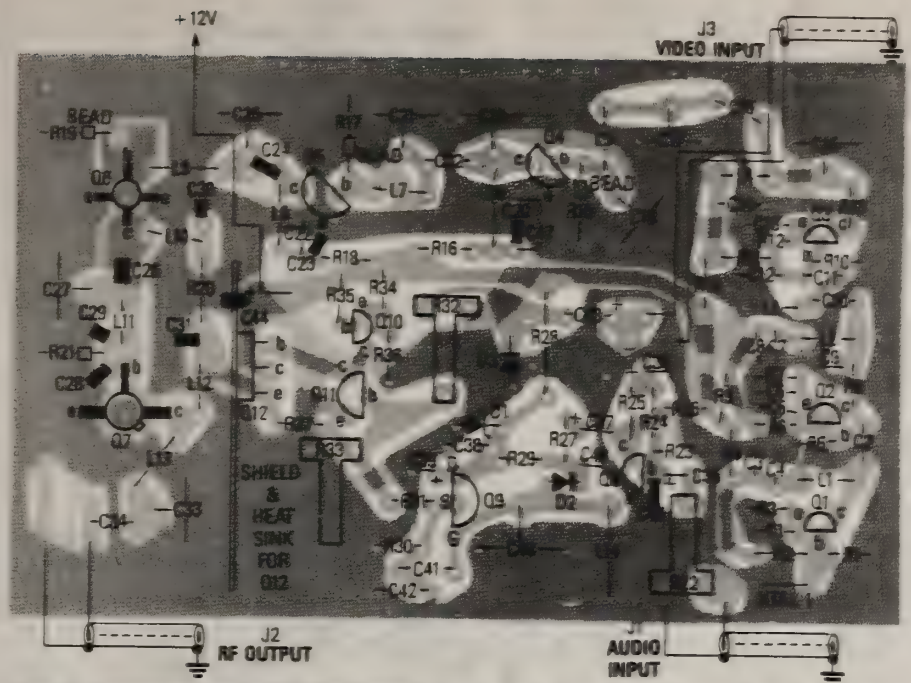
PARTS PLACEMENT DIAGRAM shows capacitor chips (C20, C23, C24, C26, C28, C29, C30, C31, C45) mounted on the solder side, as is Q6.
